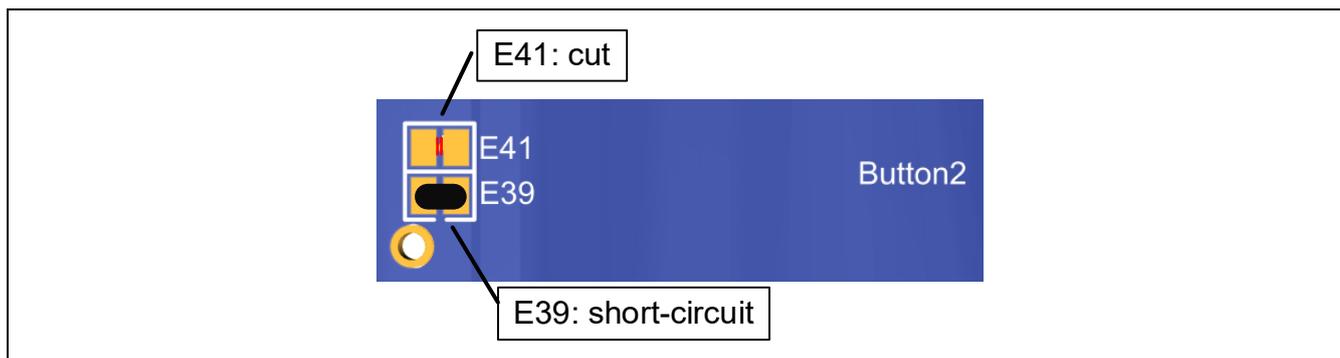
Settings for Using P57 as a Port Pin (Soldered Side)
